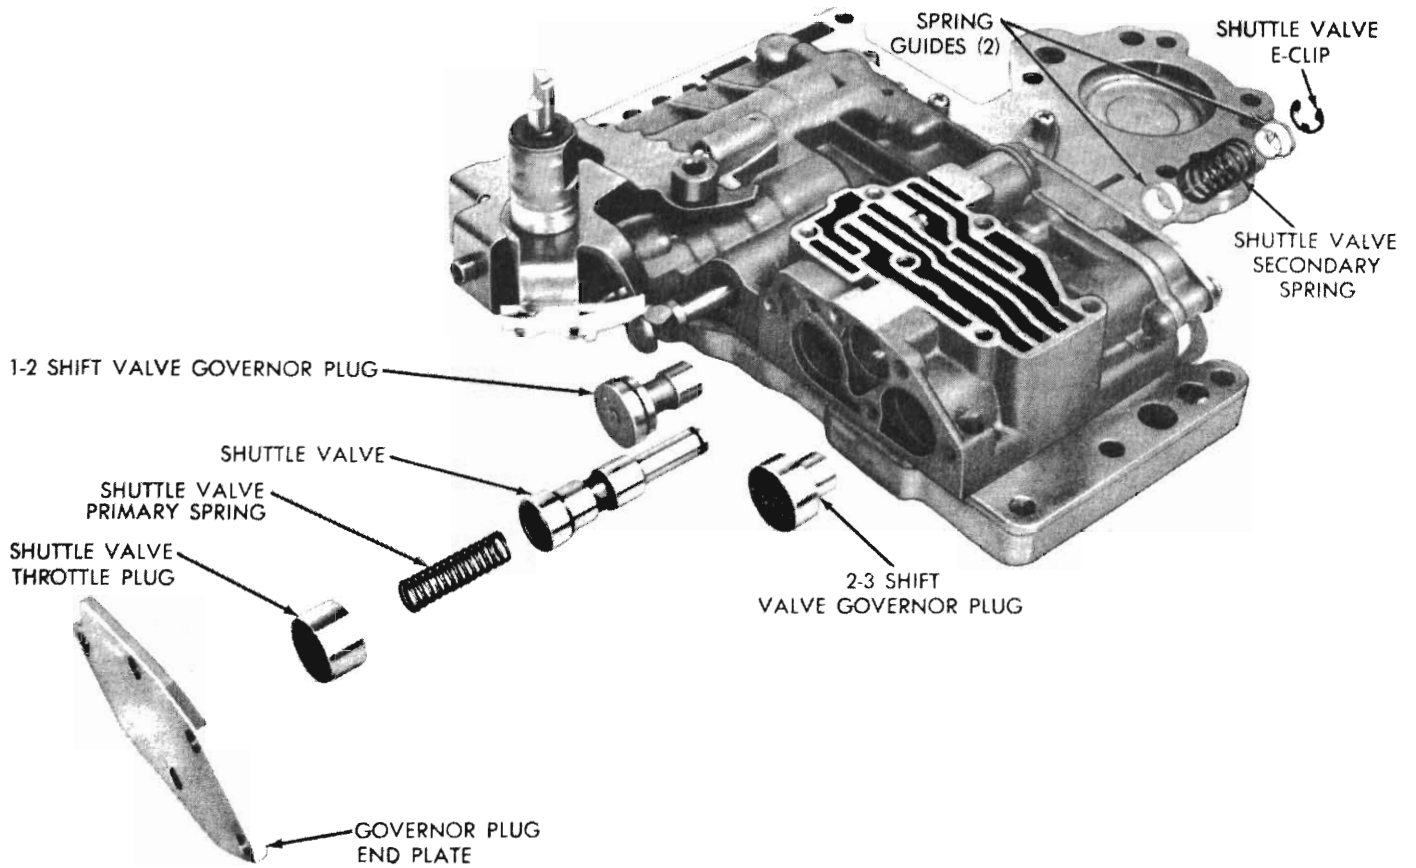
Shuttle valve and governor plugs (A-727 and A-904-LA)
